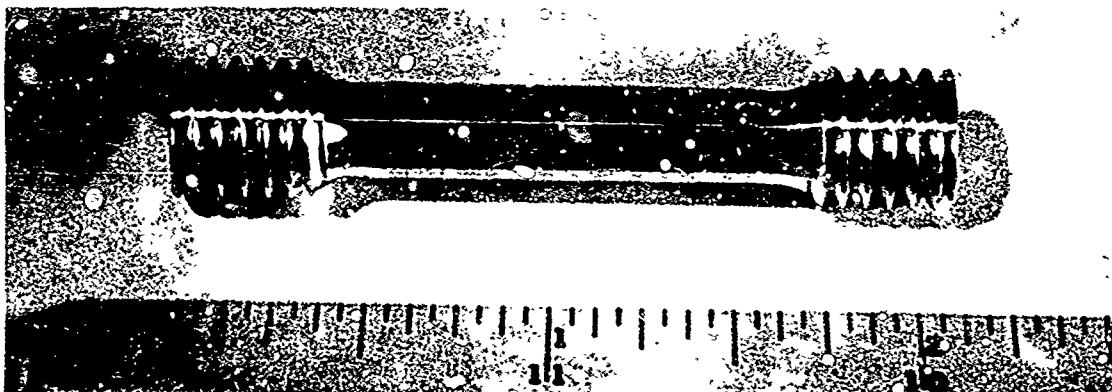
A Typical Tensile Test Specimen Prior to Surface Preparation
